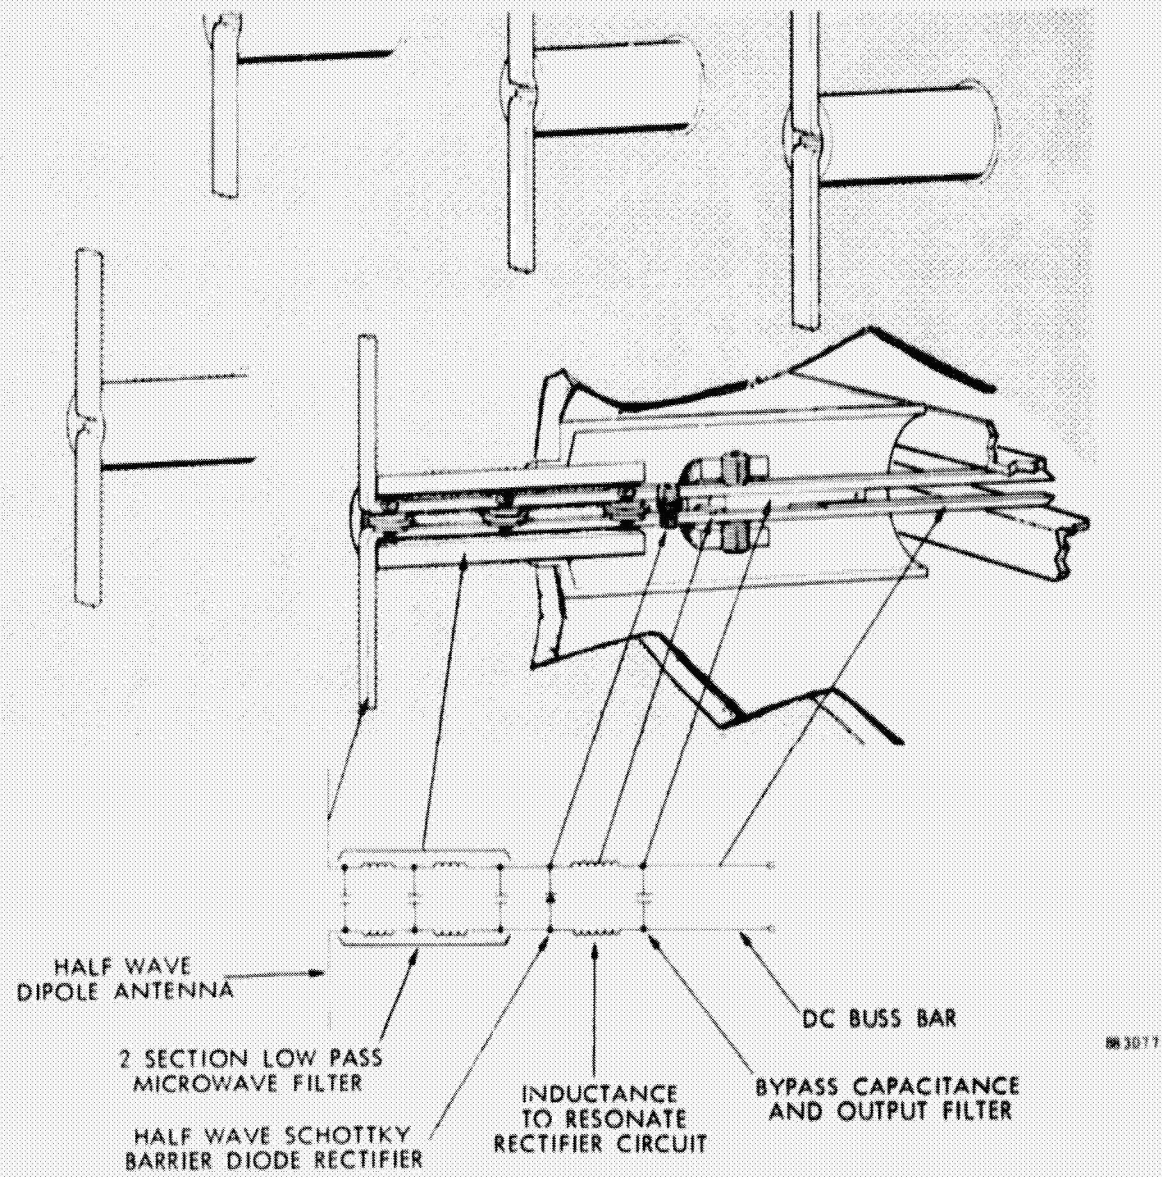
Cutaway section of the rectenna element showing the mechanical and electrical construction of the element, and how it plugs into its socket
